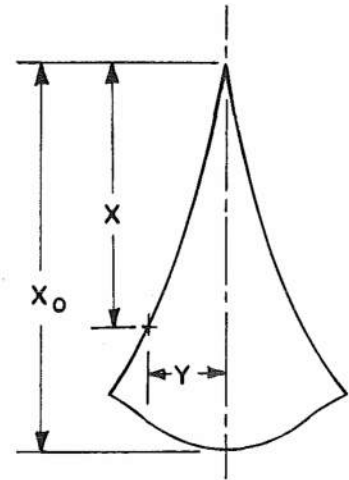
Dimensioned Sketch of the Guide Surface Parachute
